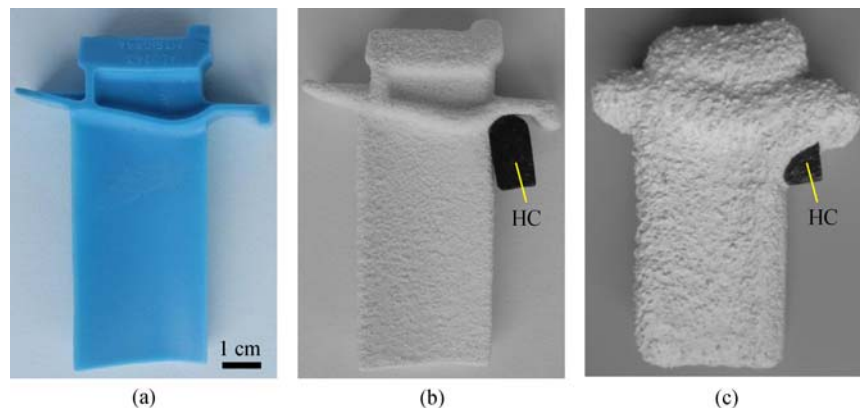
Procedure of shell mold manufacture for HC insertion. (a) Wax model; (b) attachment of HC after the first layer; (c) finished shell mold for dewaxing [29]
